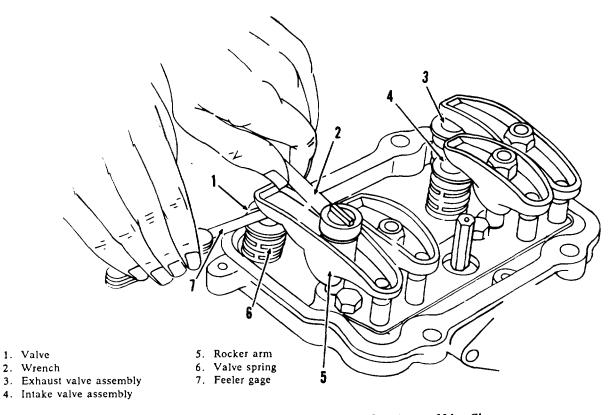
Checking and Adjusting Rocker Am-to- Valve Clearance.
